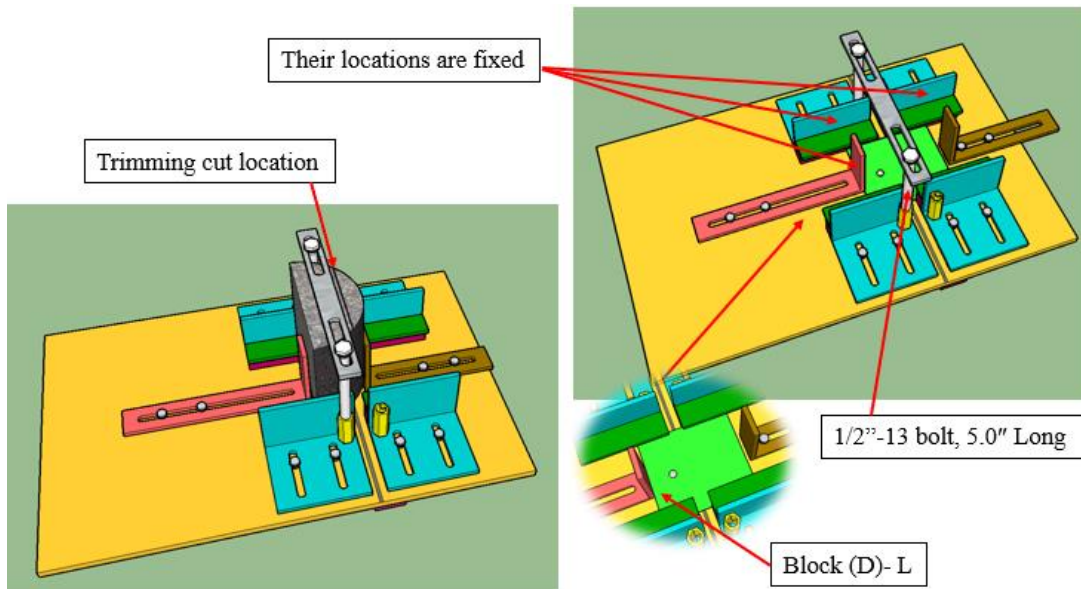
Illustration drawings to the third trim of RV specimens.
